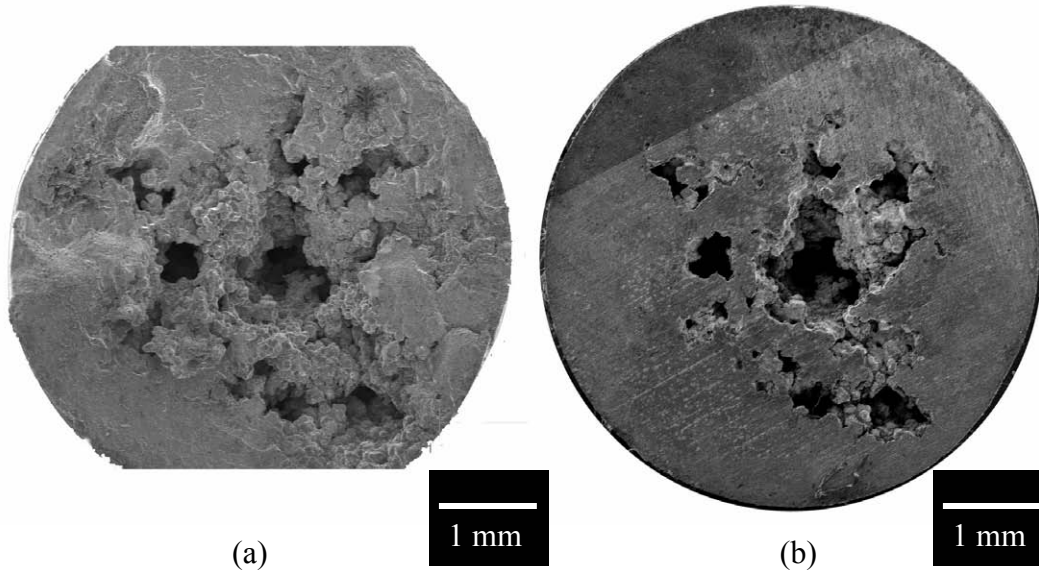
Macroporosity specimen (a) fracture surface showing signs of FCG near the edges of the specimen and (b) ground surface
